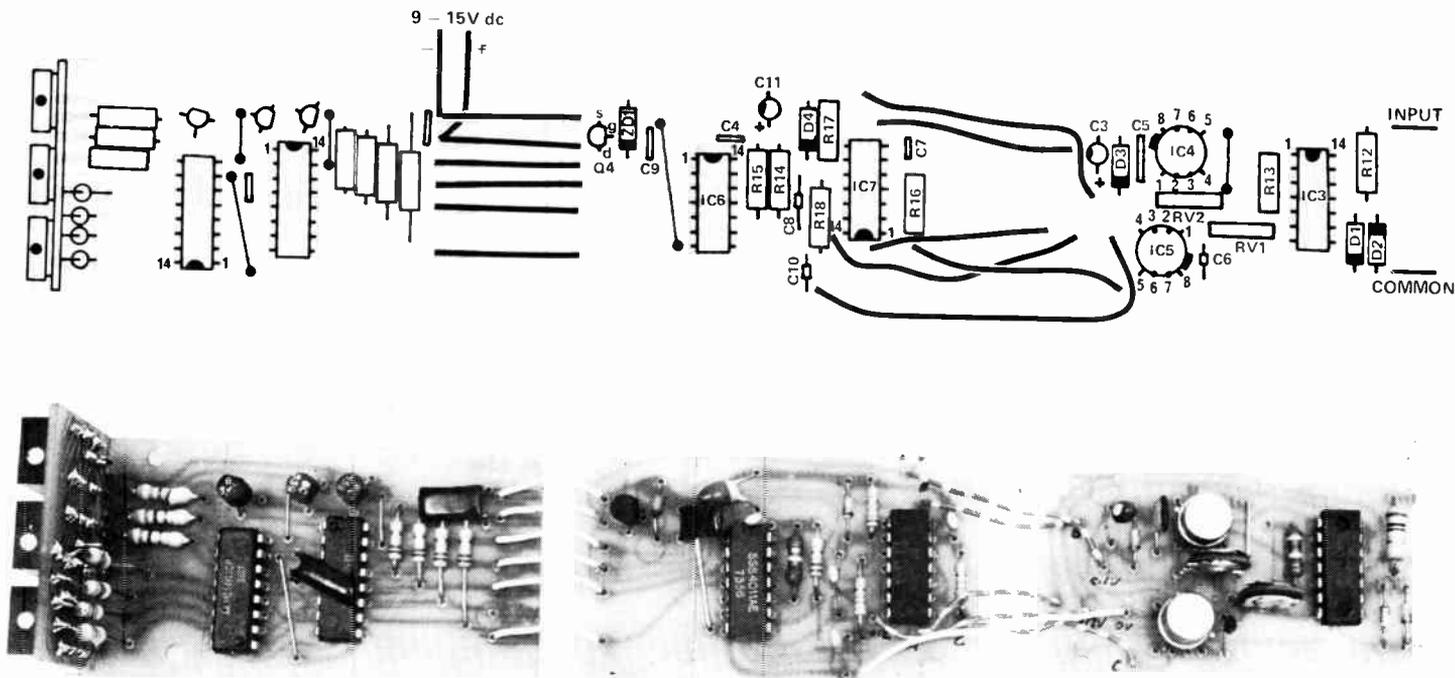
Wiring layout and actual circuit boards of the DVM shown in Fig. 11.
